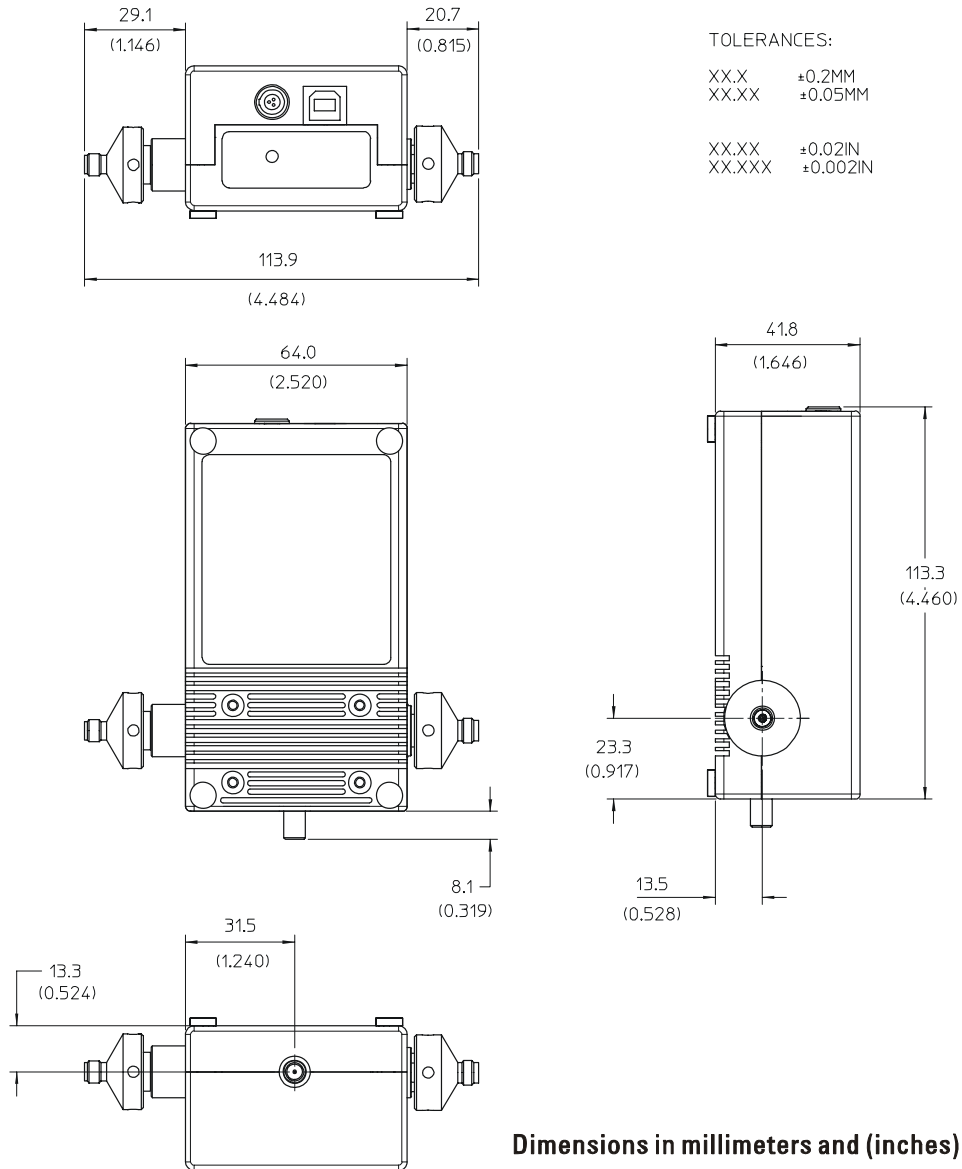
Mechanical Dimension of U9391F Comb Generator
